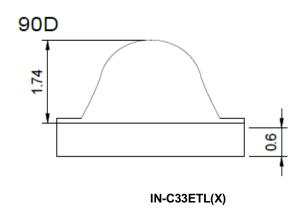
IN-C33(X)TL(X) Series Package Dimension
